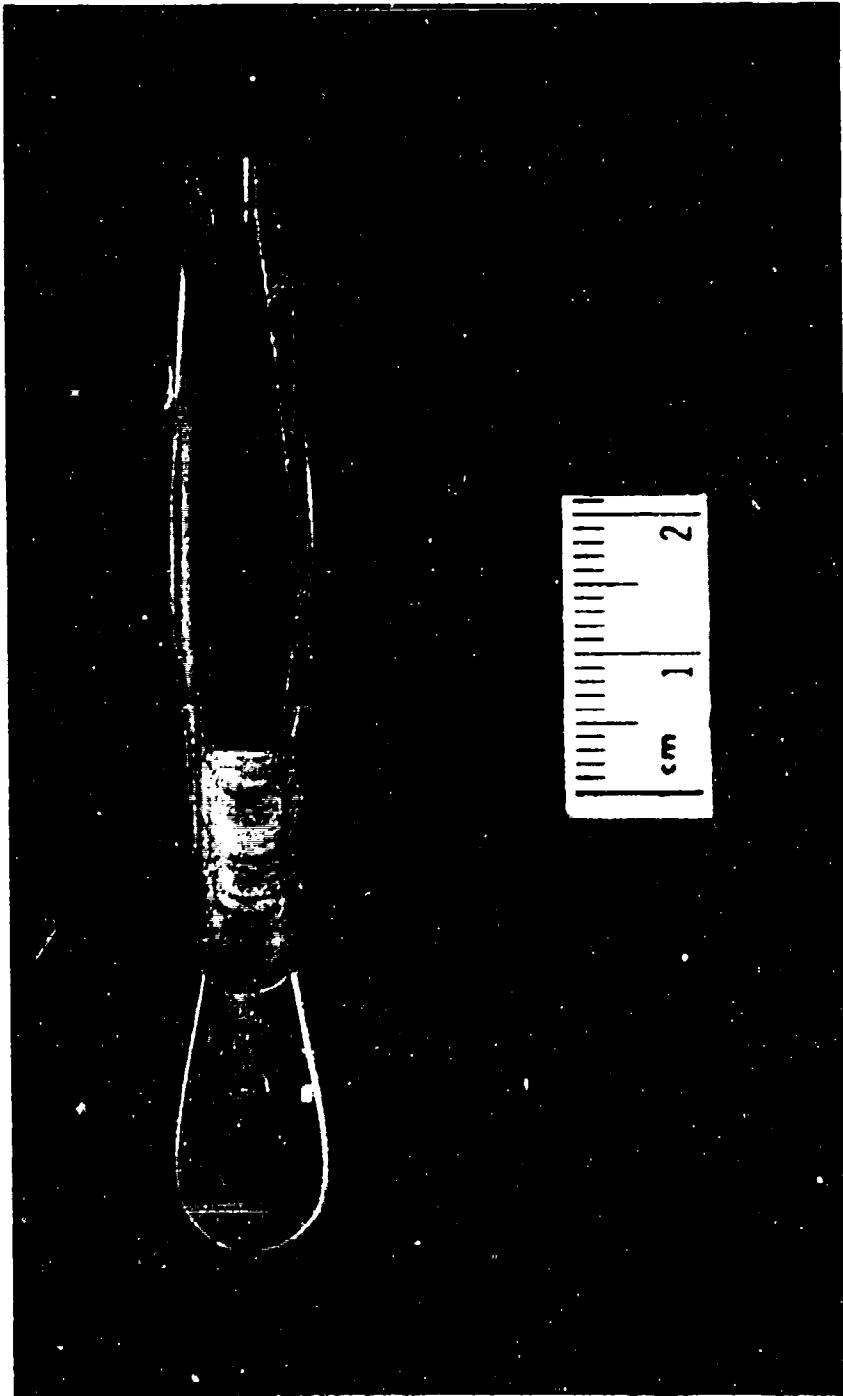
CROSS-SECTION OF FAILED STEEL CABLE TERMINATION
